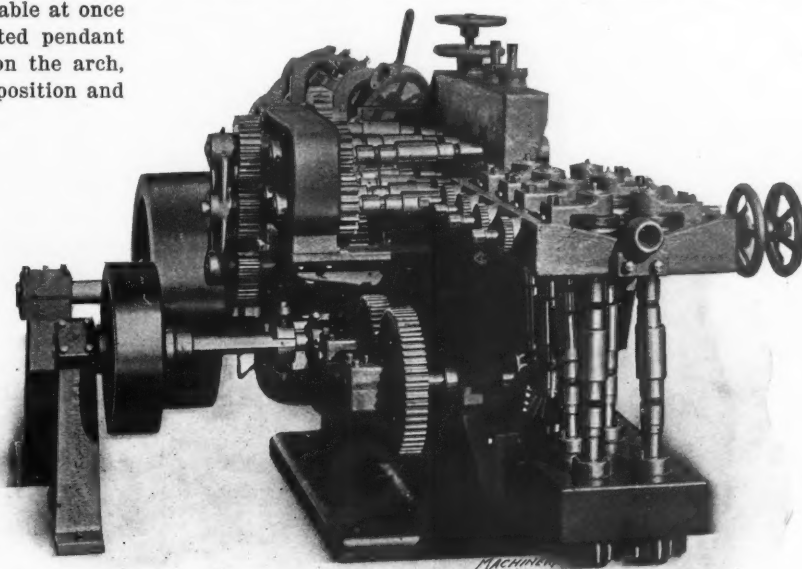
Rear View of Shuster Straightening and Cutting-off Machine
